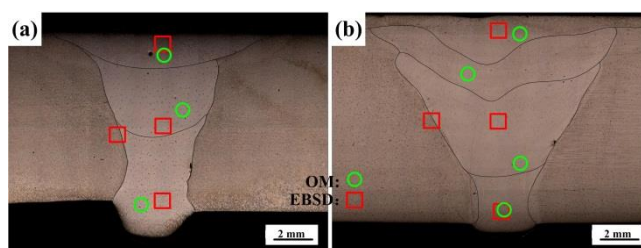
Transverse section of the welded joints for the (a) 1670-8 and (b) 1670-14.
